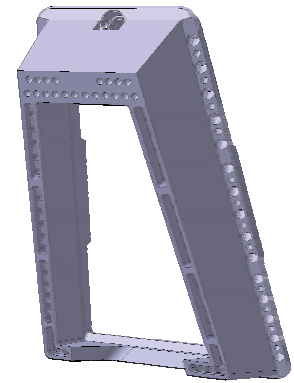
Front view of the latest BSM prototype design (w/o FWP).
